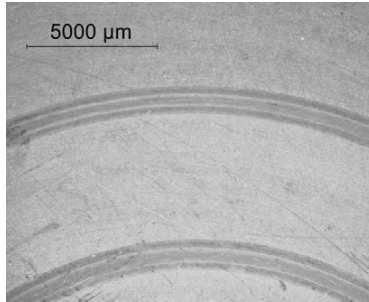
Top surface photograph of HPDL welding; seam is bent because the gas chamber did not permit a linear seam; chamber was filled with argon; $P_{HPDL} = 3 \text{ kW}$; $v_w = 4 \text{ m min}^{-1}$; bead on plate; EN AW-6060; angle $\varphi = 6^\circ$
